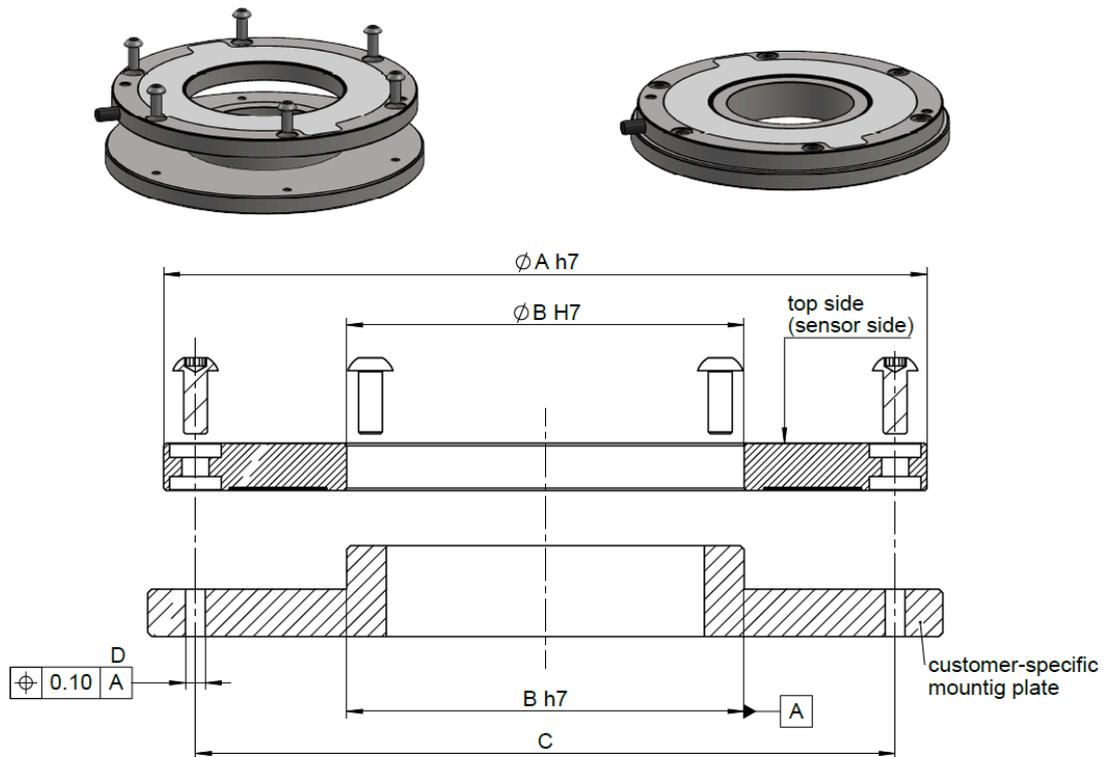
GMI Angle Stator (GAS) mounting using ID sliding fit
